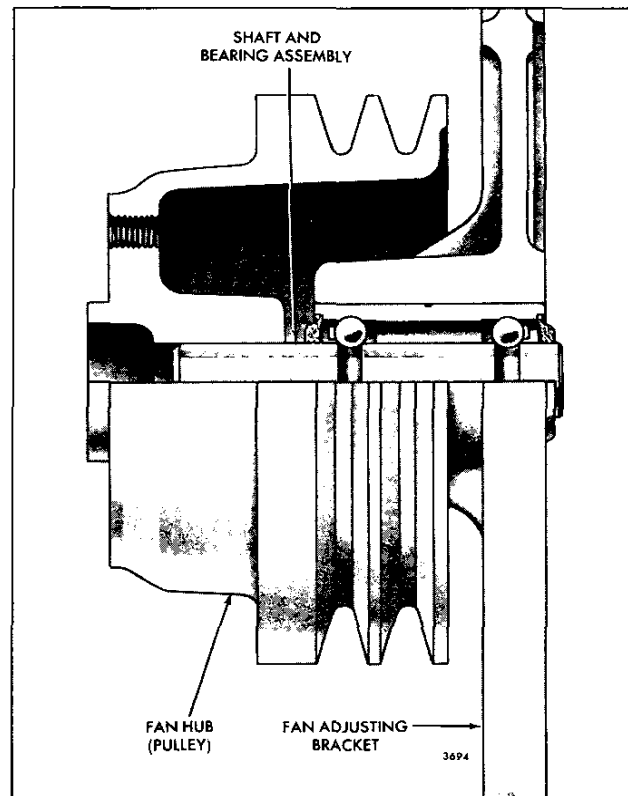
Ball Bearing Type Fan Hub Assembly
